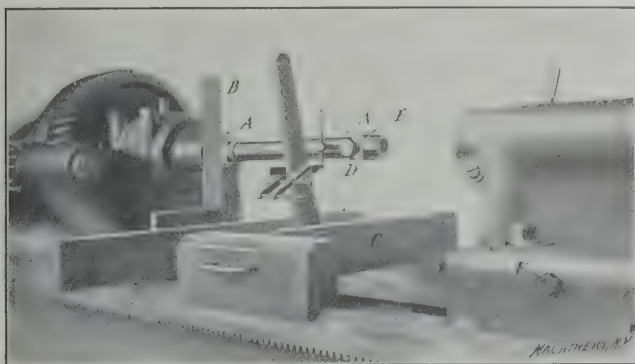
Special Form of Test Bar for Aligning Head- and Tail-stock. Plane Surfaces are used for Testing Parallelism, and Cylindrical Surfaces for Testing Concentricity
